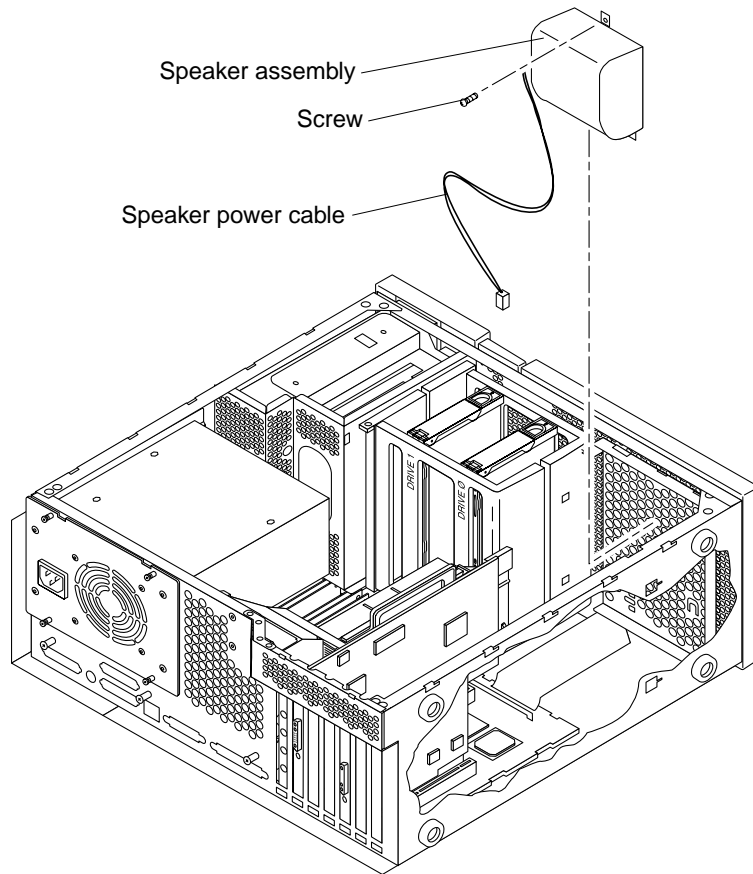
Removing and Replacing the Speaker Assembly
